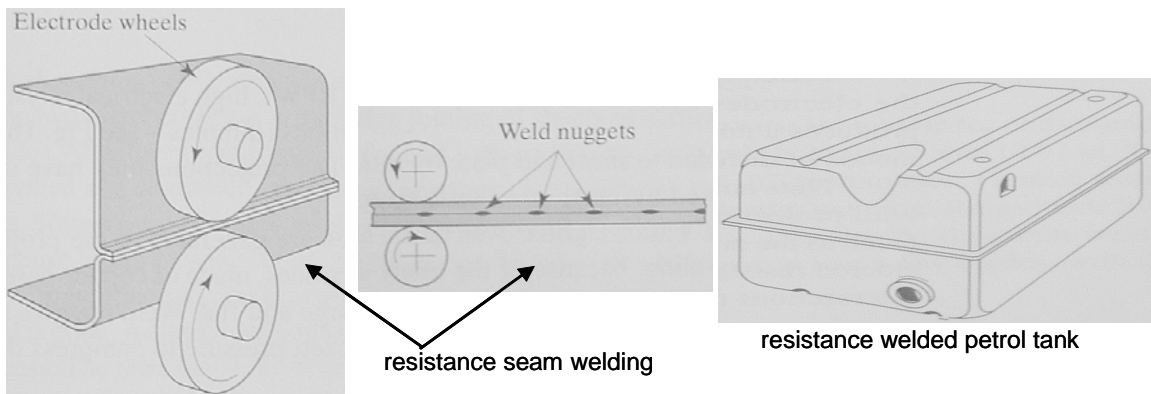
Seam welding (a type of resistance welding) [source: Kalpakjian & Schmid]
